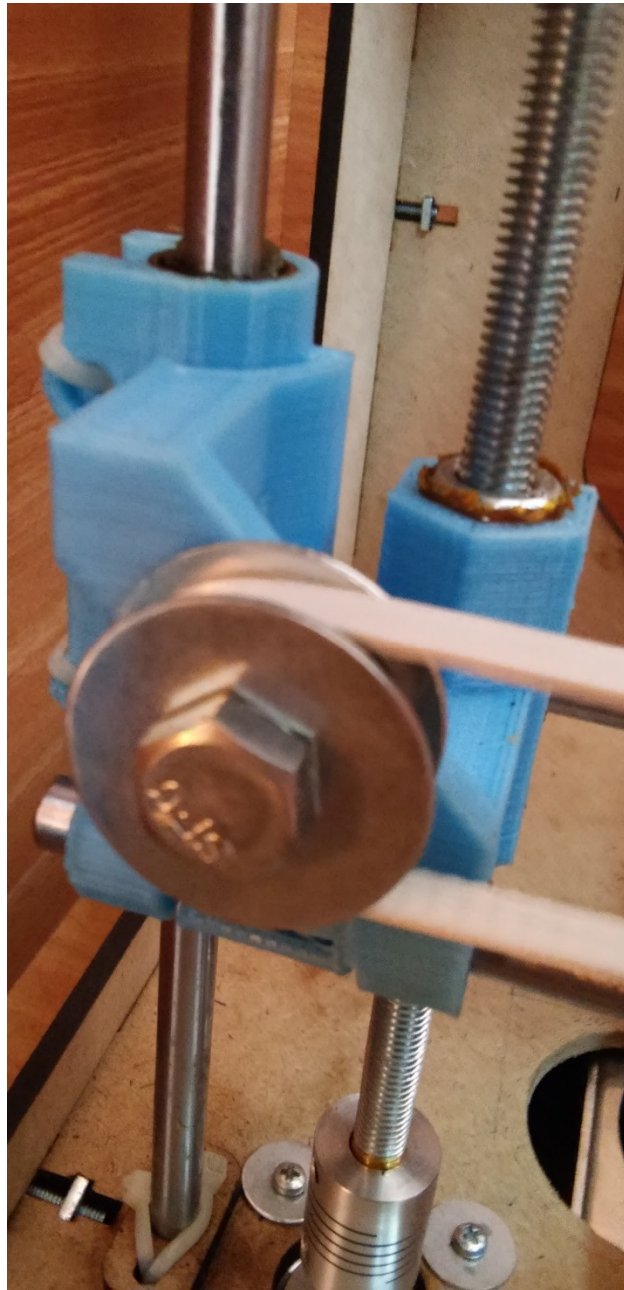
5/8mm Aluminum coupler on motor shaft
